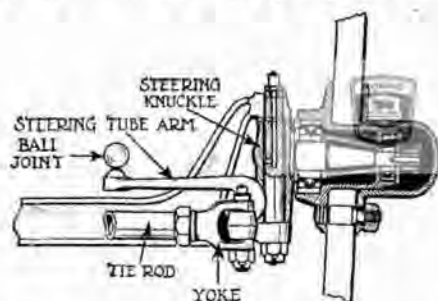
Uniting the two steering knuckles so that they move in unison is a tie-rod or steering cross tube.
